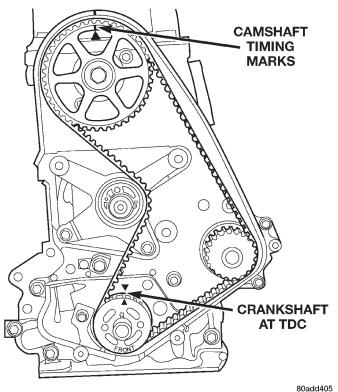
Adjusting Crankshaft Sprocket for Timing Belt Installation
